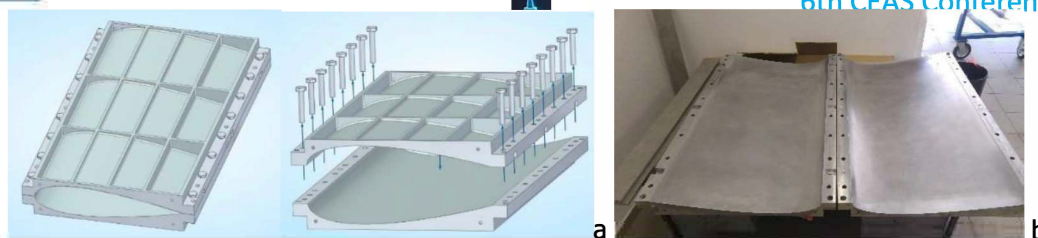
(a) CAD model of the mould (b) manufactured two piece aluminium mould
